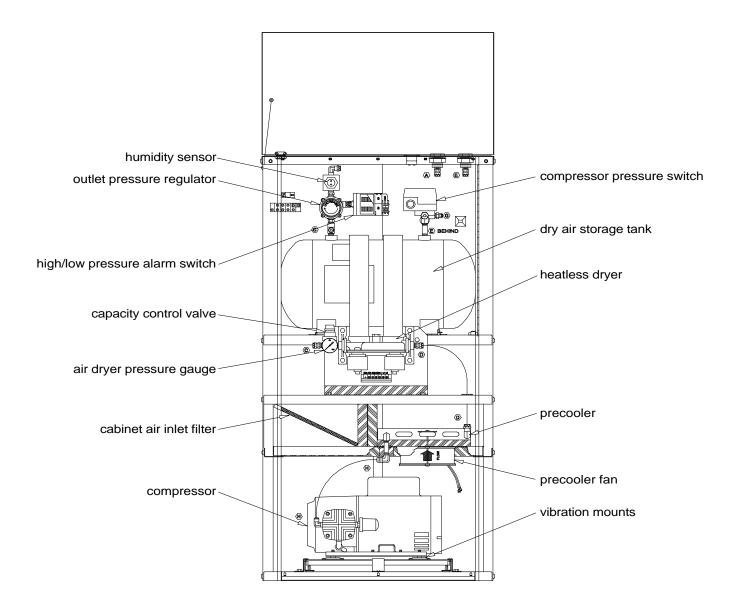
FRONT VIEW OF PUREGAS P4200DCO3A
